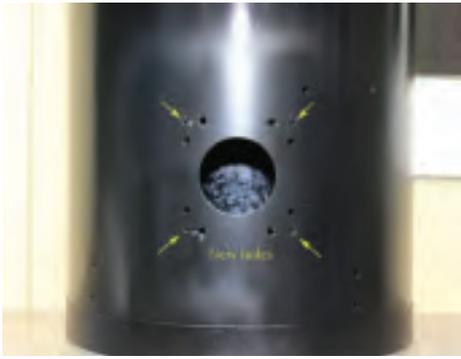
The author first drilled pilot holes with a handheld cordless drill using a small drill bit and then used larger diameter bits to achieve finished holes of the correct size.
